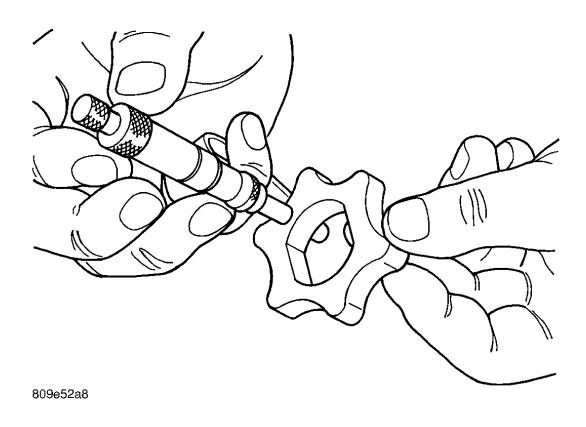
Measuring Inner Rotor Thickness Courtesy of CHRYSLER LLC
